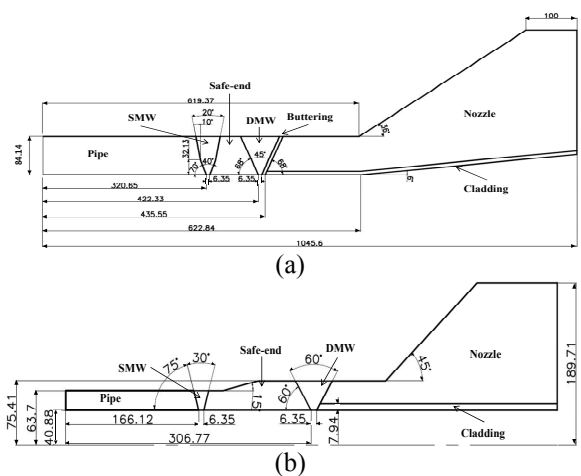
Geometries of dissimilar metal butt welds considered in the present study; (a) inlet nozzle and (b) safety-injection nozzle (Unit: mm)
